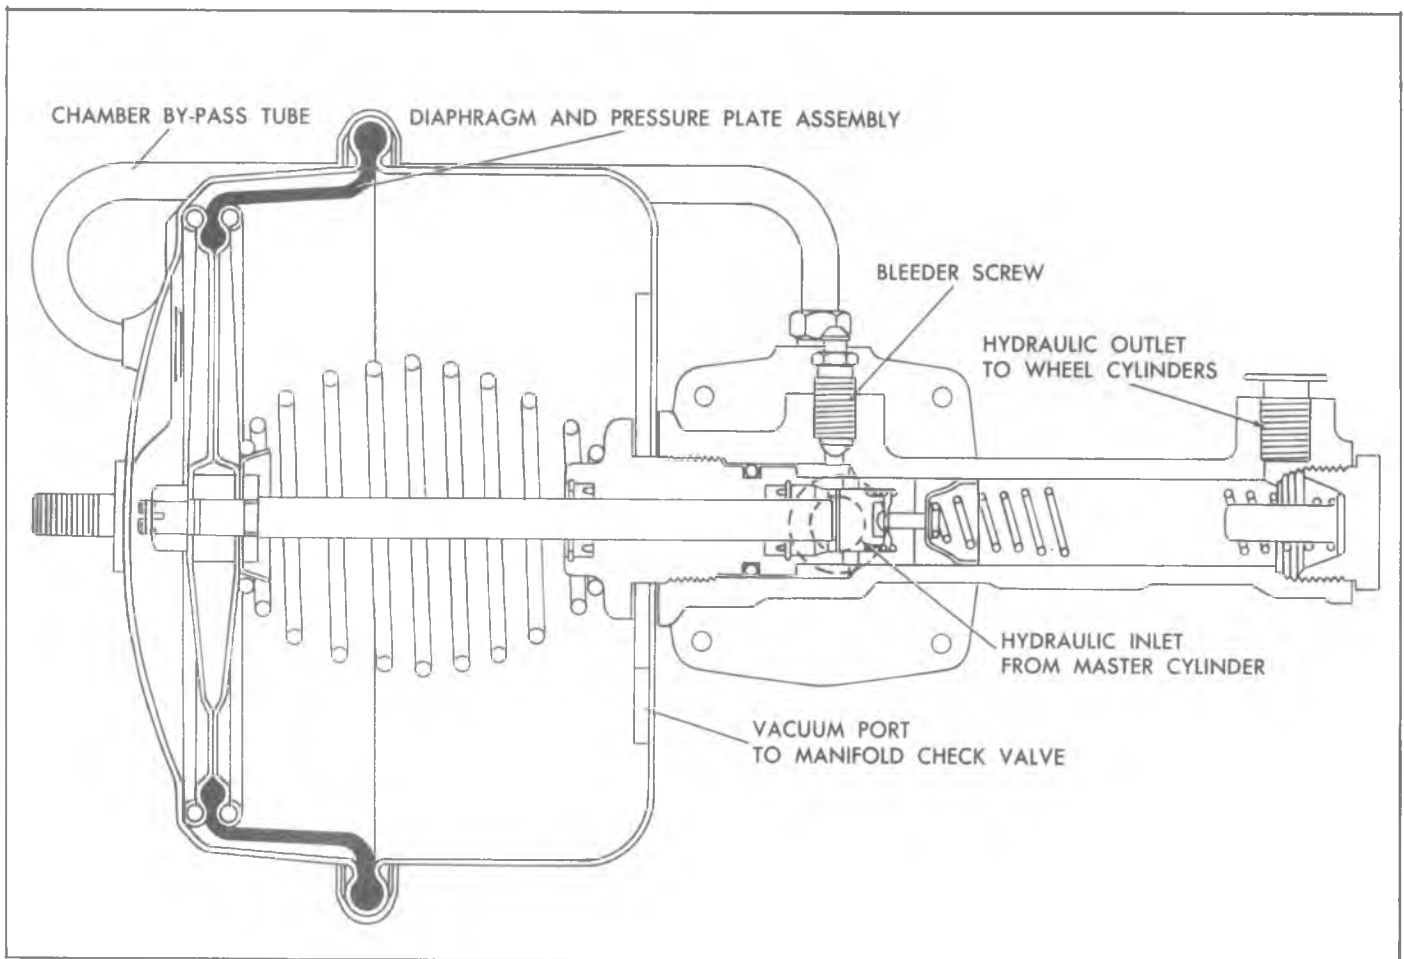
Typical Hy-Power Unit—Bleeder Position
